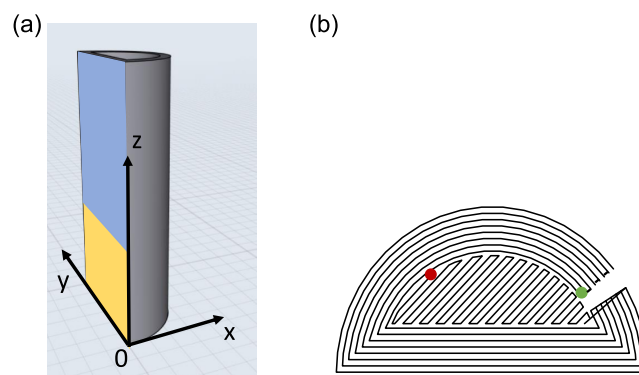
(a) CAD drawing of the chosen model component with a coordinate system. (b) Top view on one layer. Trace of nozzle starting with innermost perimeter (green dot) printing to outermost perimeter, followed by filling stage in angle of $\pm 45^\circ$. End point of layer printing is indicated by a red dot.
